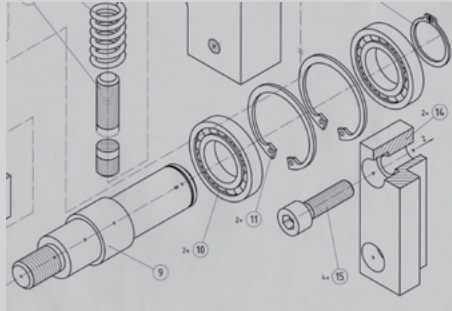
(Detail of Fig.14). *Statement (assembly in exploded isometric view)
